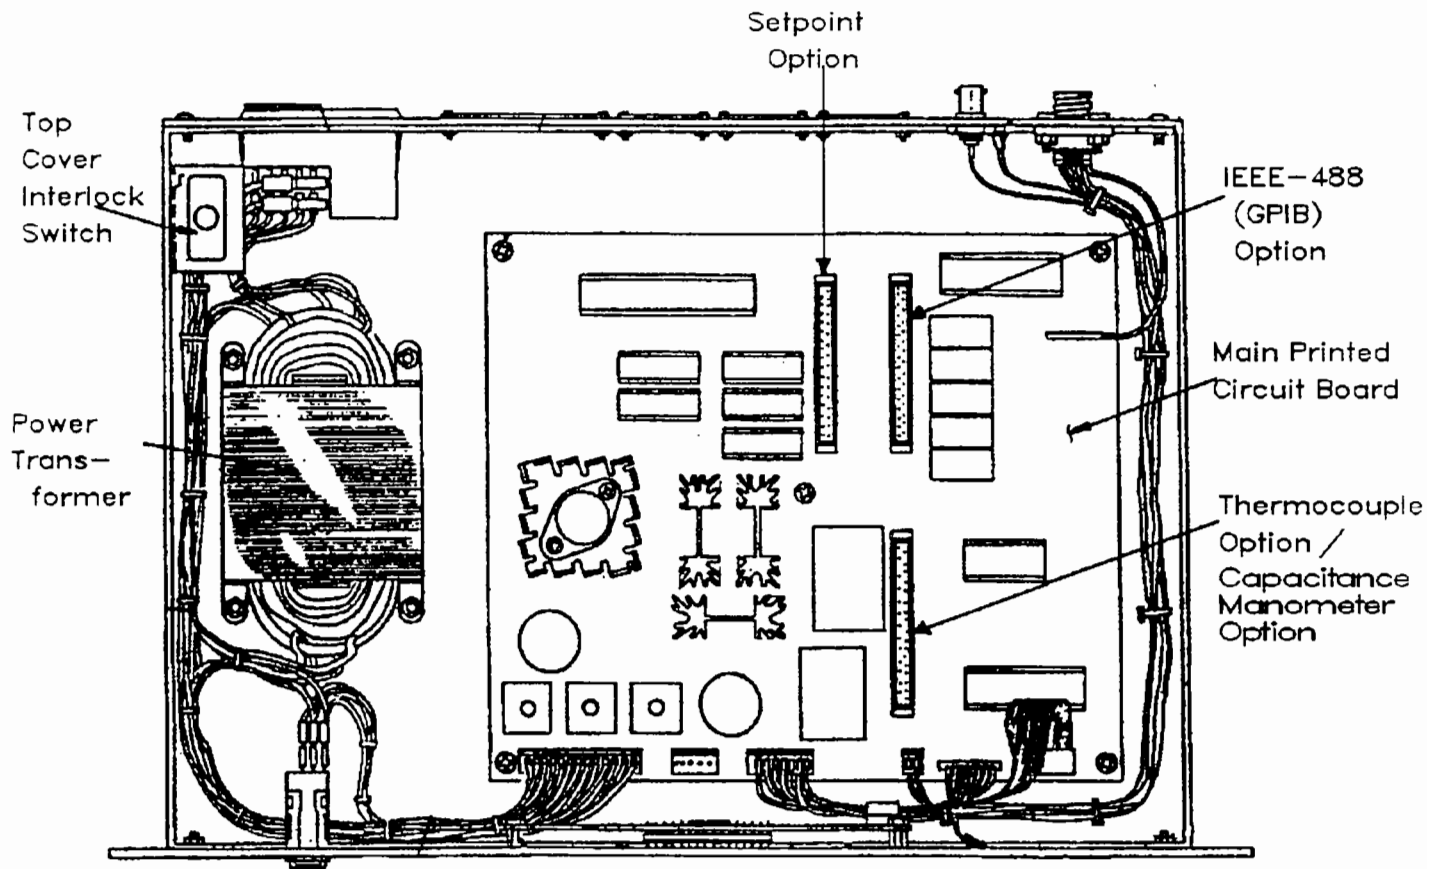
Monitorr Unit Assembly Mother Board and Options.
